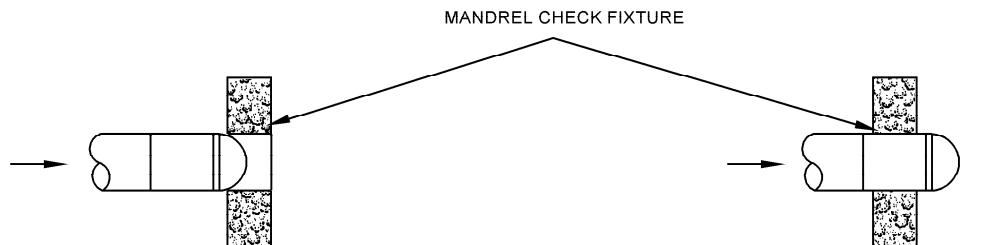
Tooling ForceTec Plate Nut Installation (Sheet 1 of 3)
